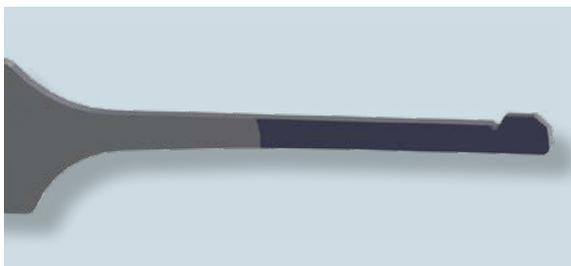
The blade and the spring form a single unit. This solution allows simple handling despite the miniature dimensions.
